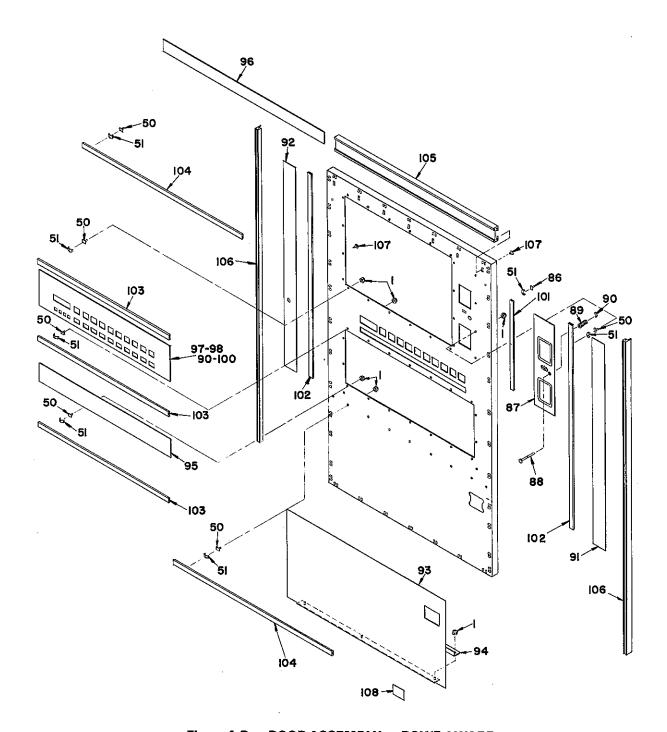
B — DOOR ASSEMBLY — ROWE AWARD
